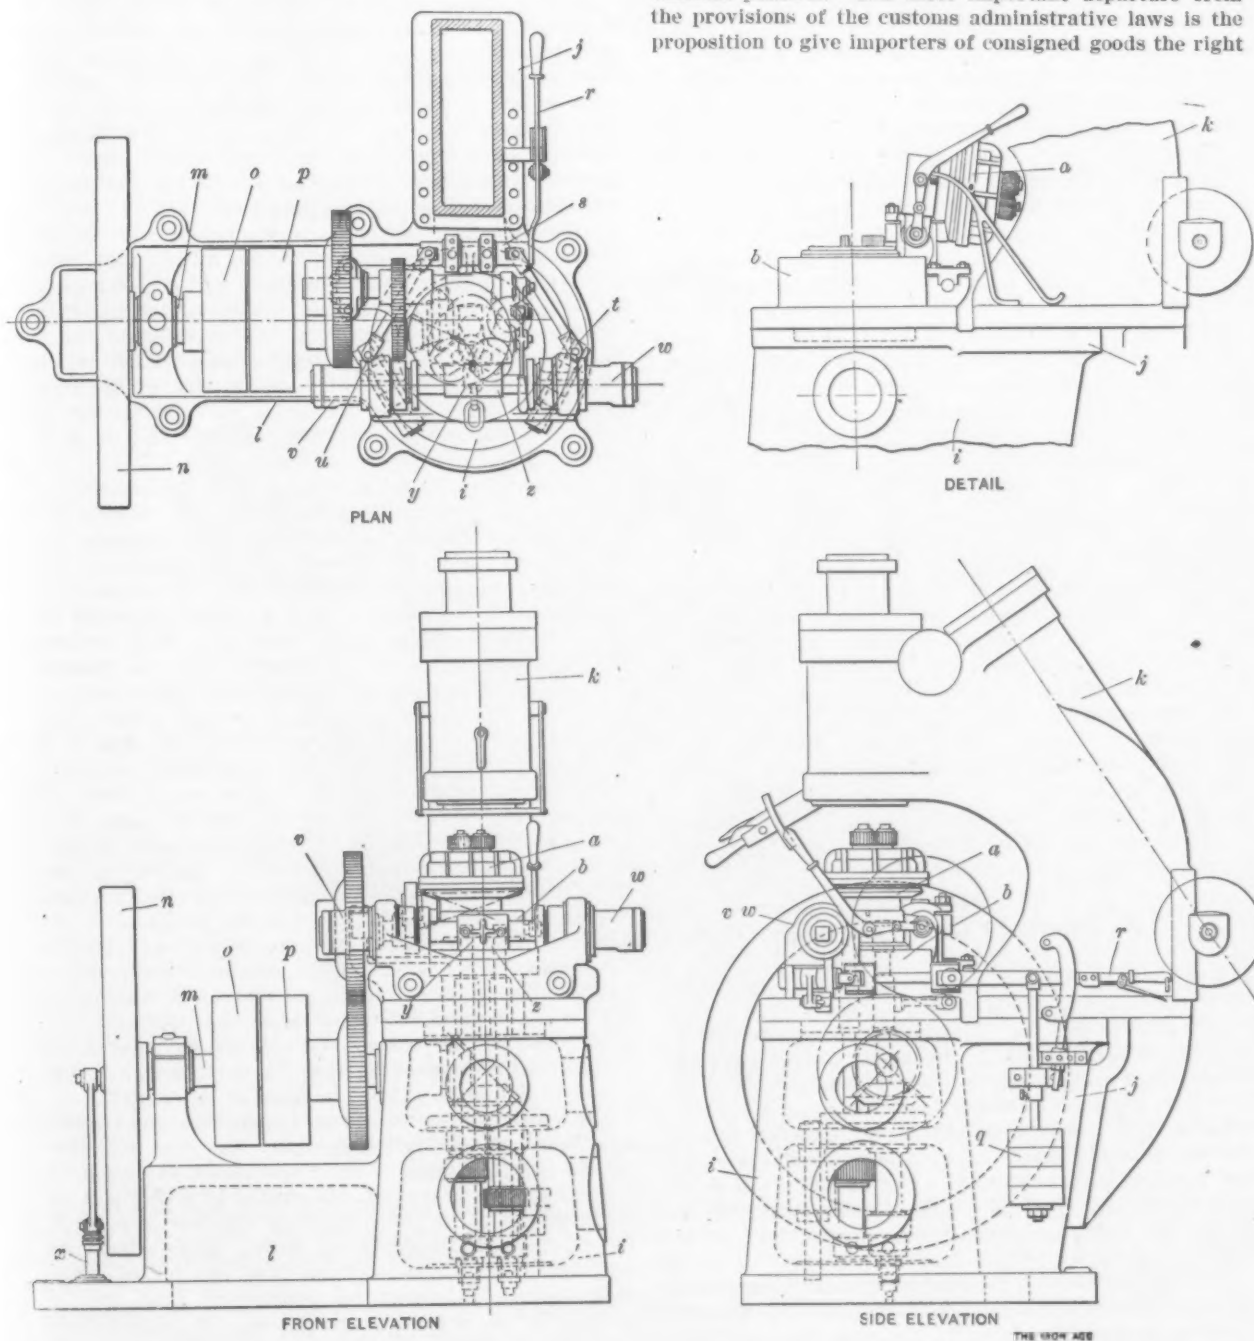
Details of a Lelong Machine Capable of Making Chains from 5-16 to 1 Inch in Diameter.
